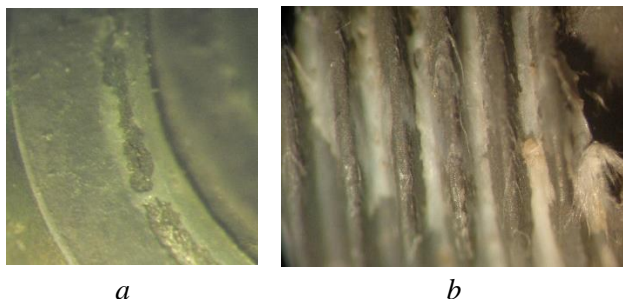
View thread: *a* – multiple cracks internal thread ($\times 4$ zoom 2); *b* – the sample surface the thread 2 ($\times 4$ zoom 2)
